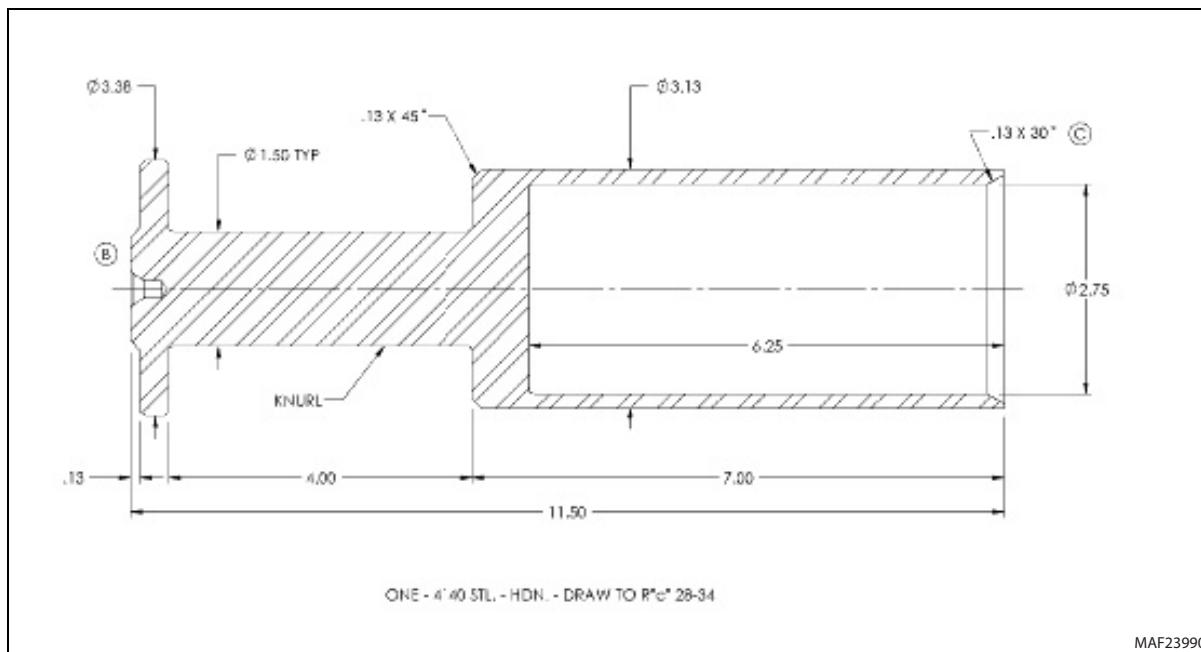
Bearing Cone Pressing Tool (T145741)
